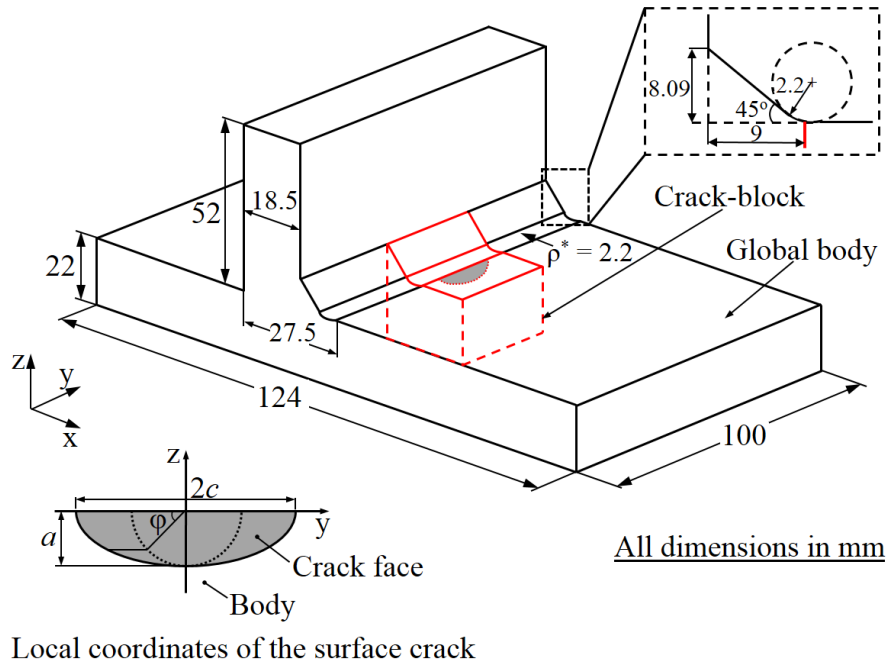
Geometry of the surface cracked T-butt welded joint.
